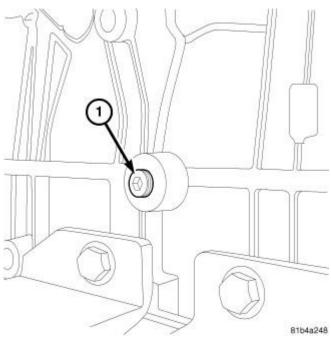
Crank Lock Plug Location Courtesy of CHRYSLER LLC
